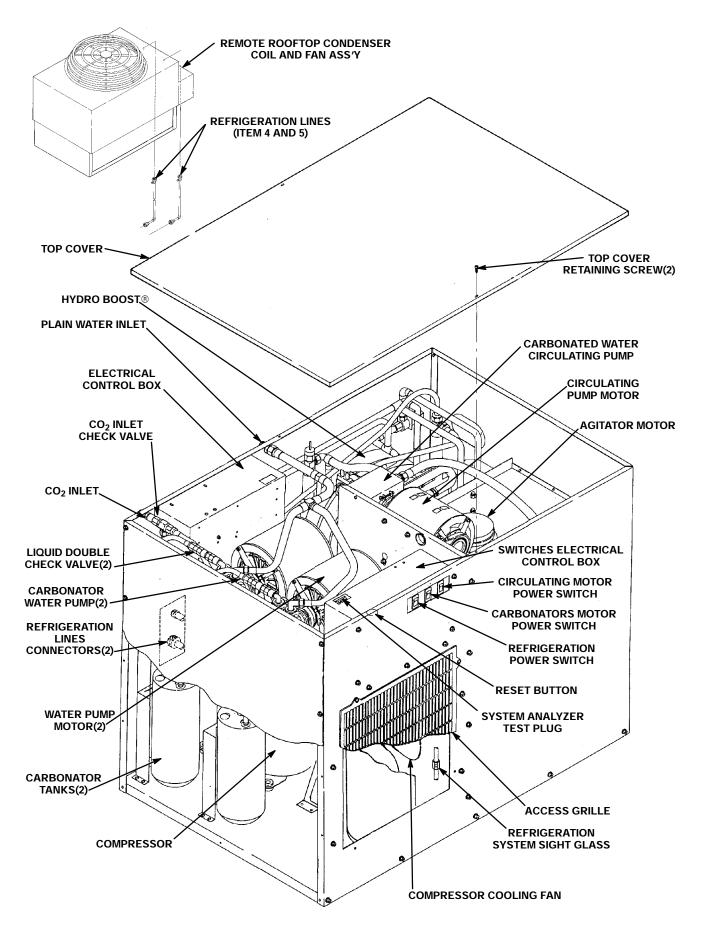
PARTS IDENTIFICATION (COOLING UNIT REQUIRING CONNECTION TO REMOTE CONDENSER COIL AND FAN ASSEMBLY) 23 3003
